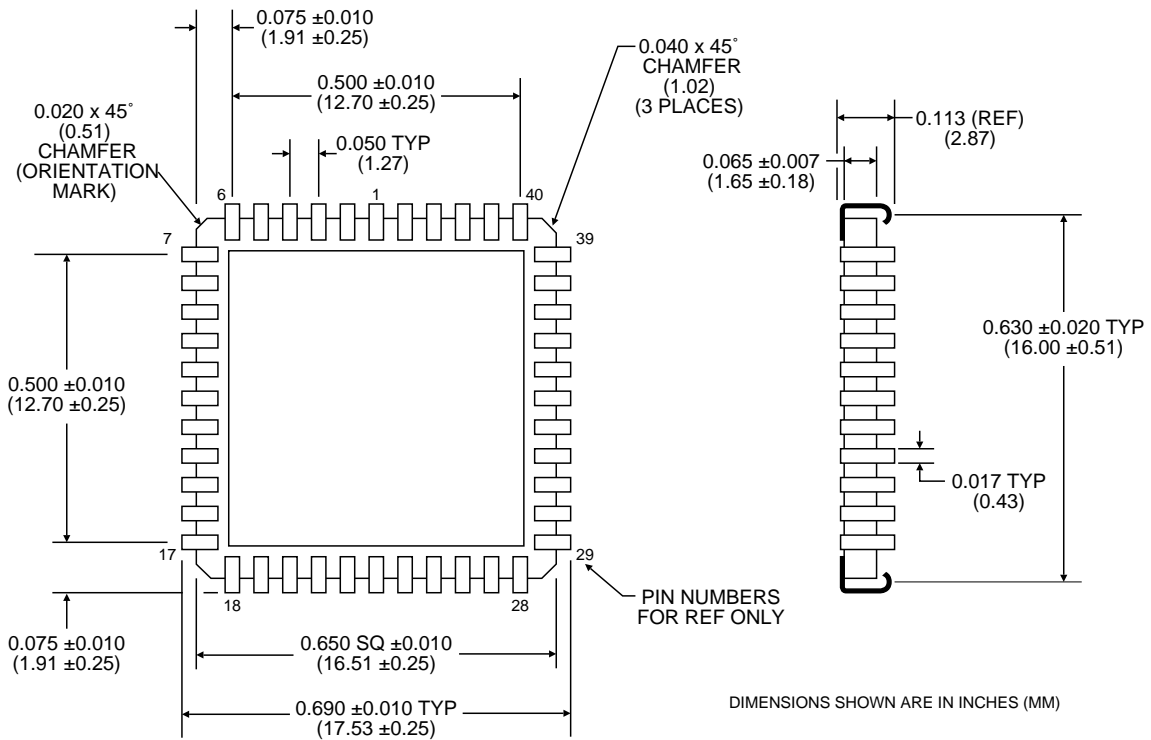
RDC-19222S (44-PIN CERAMIC J-LEAD) MECHANICAL OUTLINE
